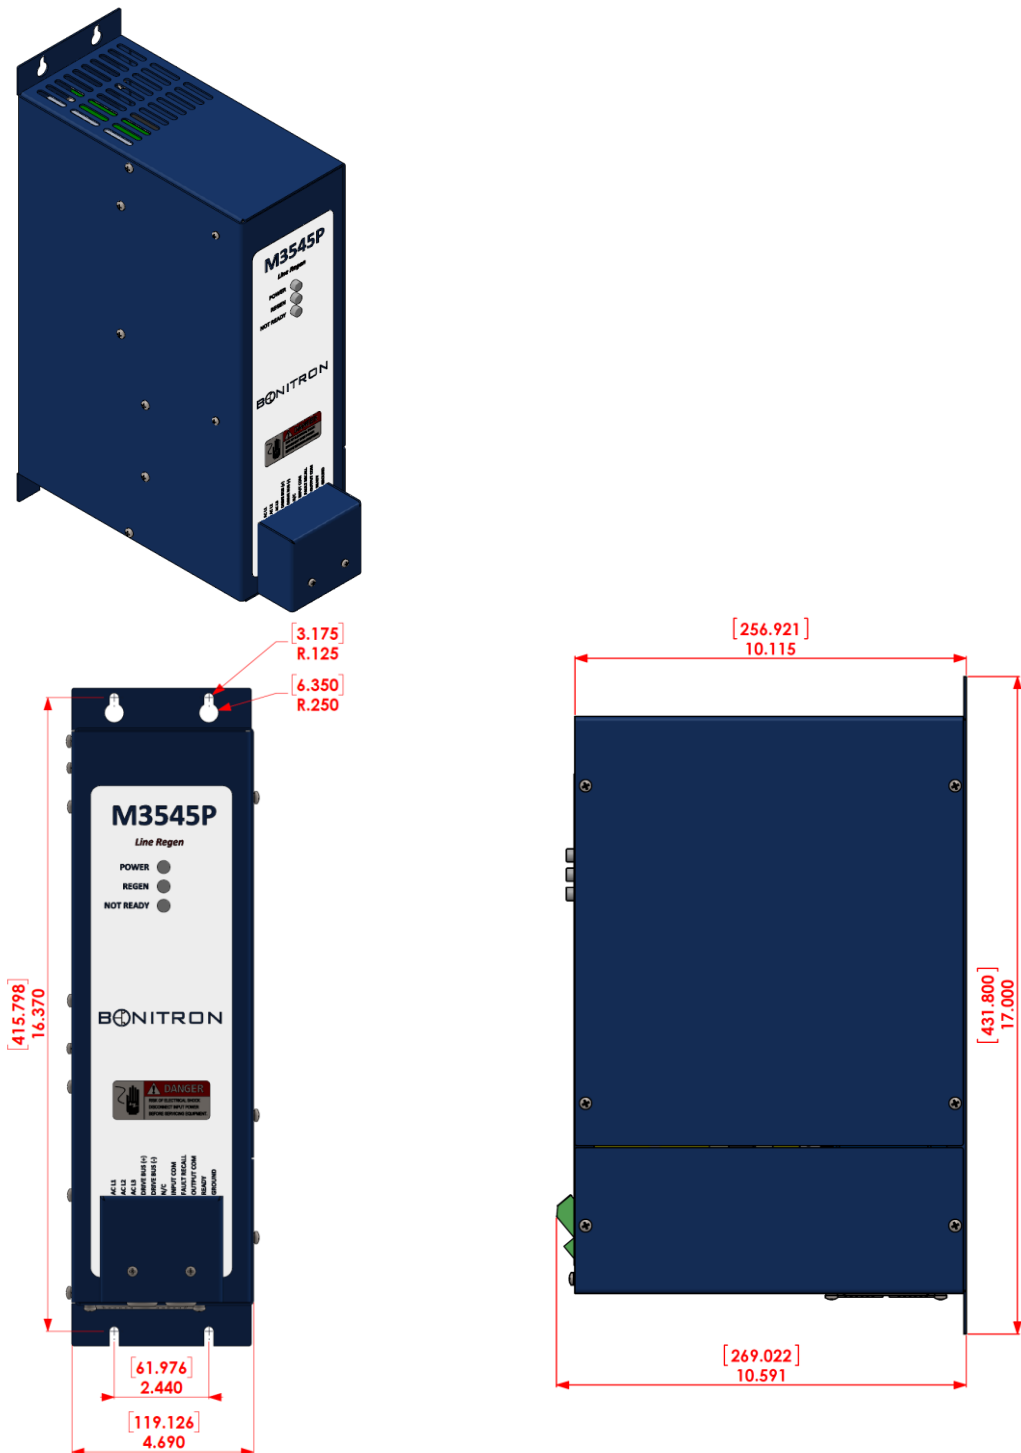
M3545P M4 Chassis Dimensional Outline
